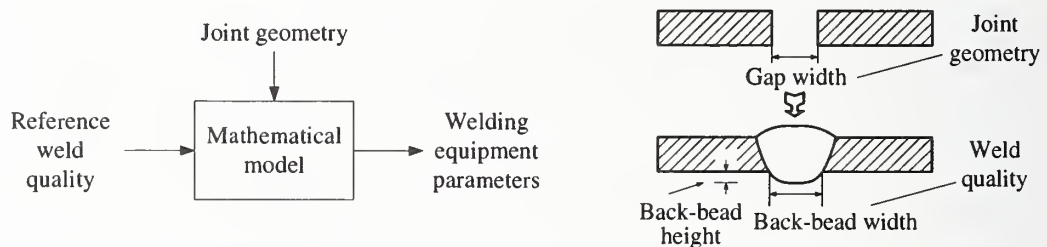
The process model maps weld quality and joint geometry into welding parameters.
